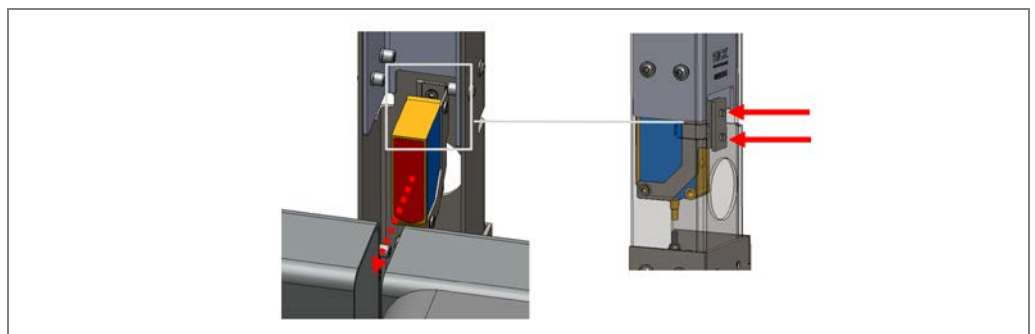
Steel frame: mounting the photoelectric sensor on the bar
